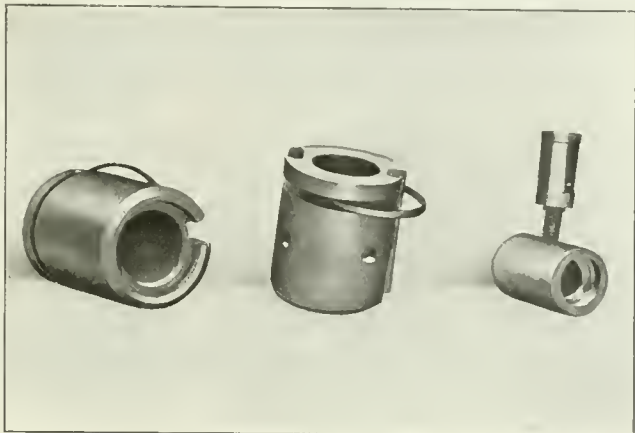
Three Views of Die-cast Bearing; these Bearings only require Finish Reaming
